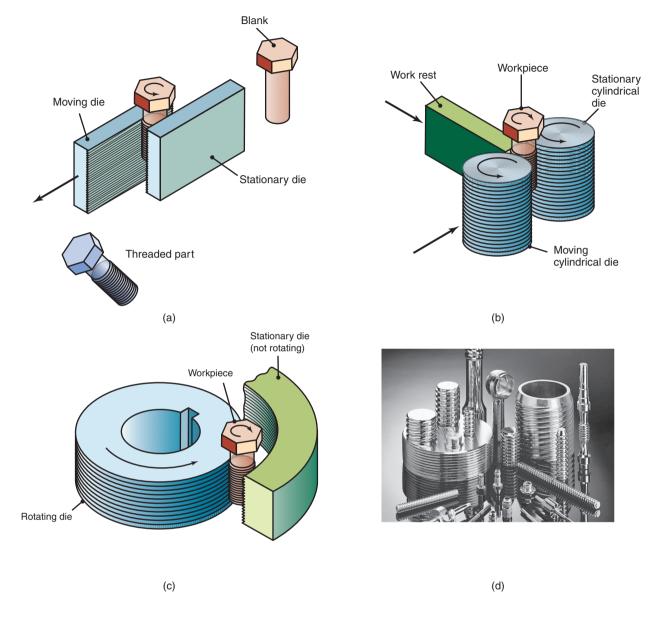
Thread-rolling processes: (a) reciprocating flat dies used to produce a threaded fastener; (b) two-roll dies; (c) rotary or planetary die set; (d) A collection of thread-rolled parts made economically at high production rates. *Source:* Courtesy of Tesker Manufacturing Corp.
